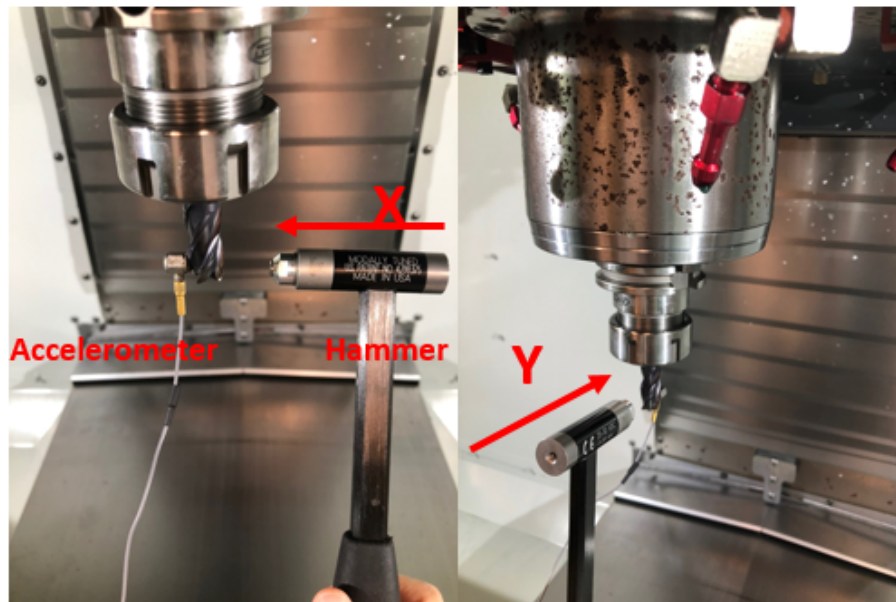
Impact hammer testing at milling tool tip in X and Y direction.
